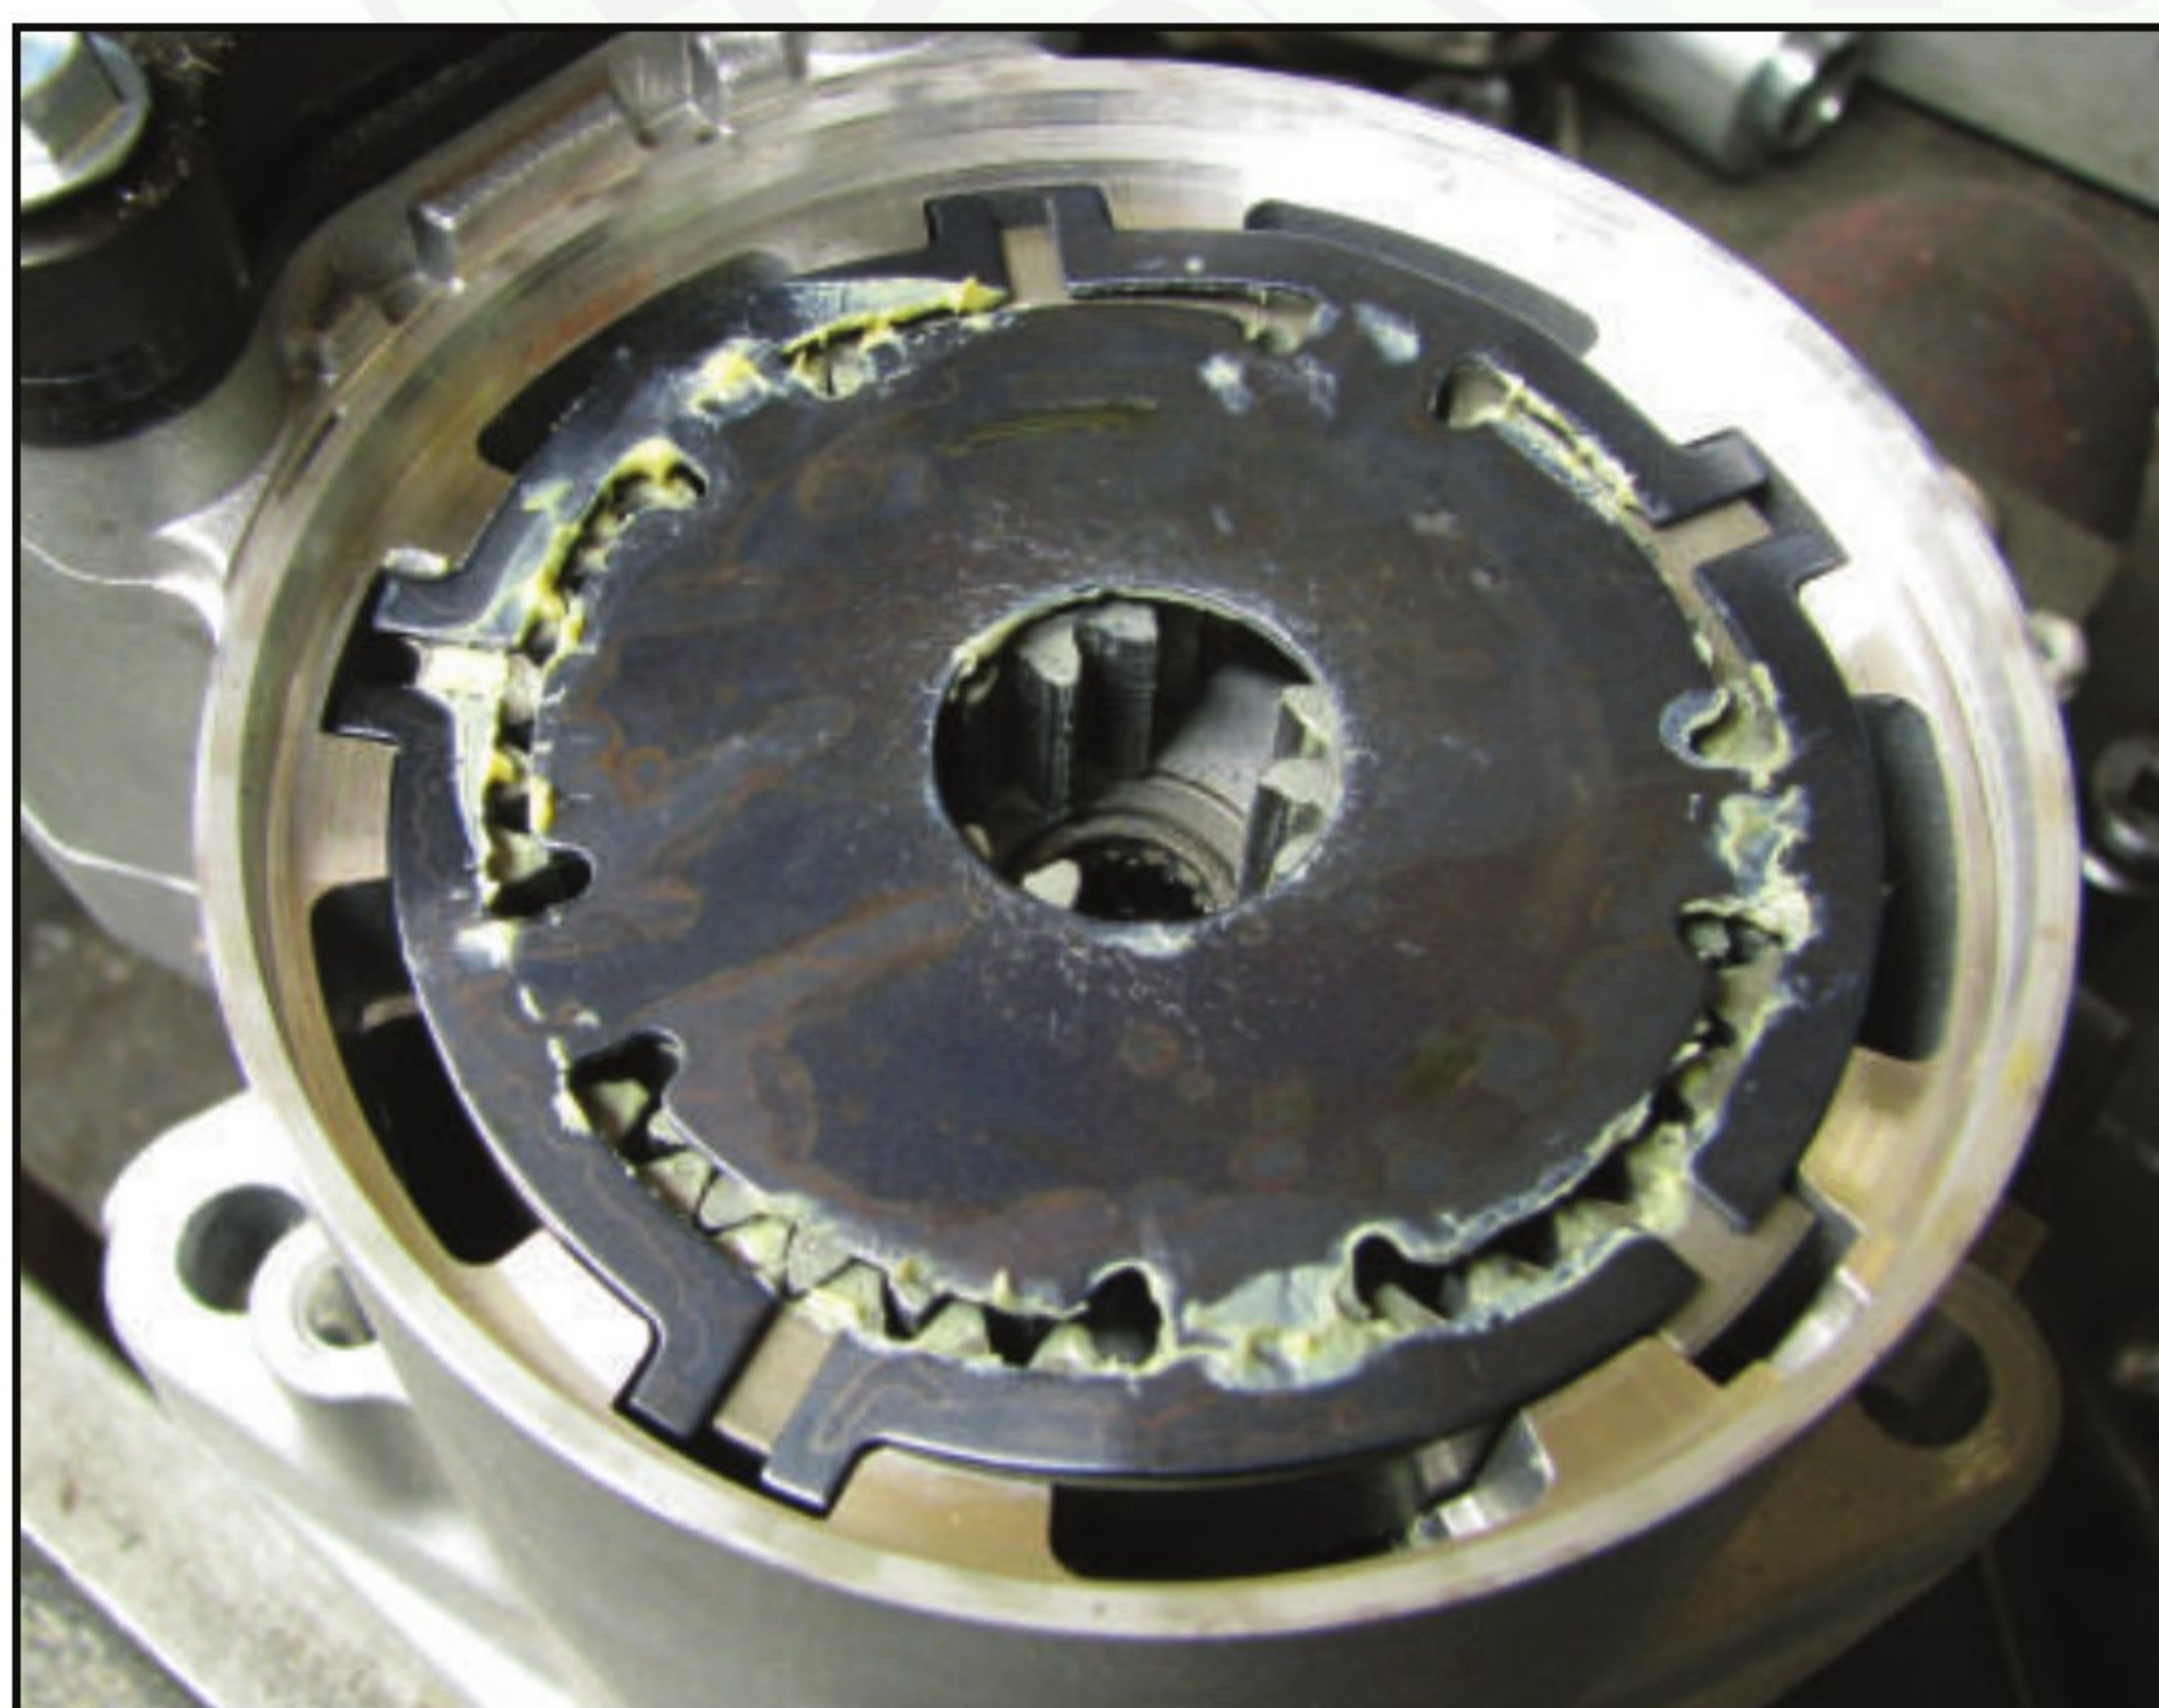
The spring plate in position here may stick to the back of the cover plate when it is removed.
